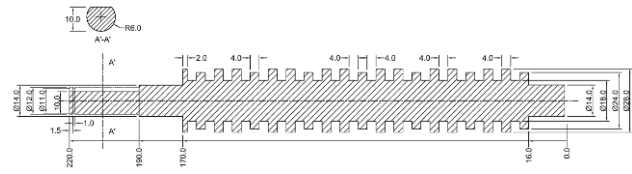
Sectional view of the 4 mm flat noodles cutting shaft
